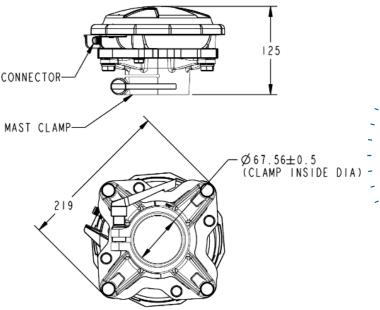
Technical Drawing of Zephyr 3 with 3"Mast Mounting PN 125000-10-INT
